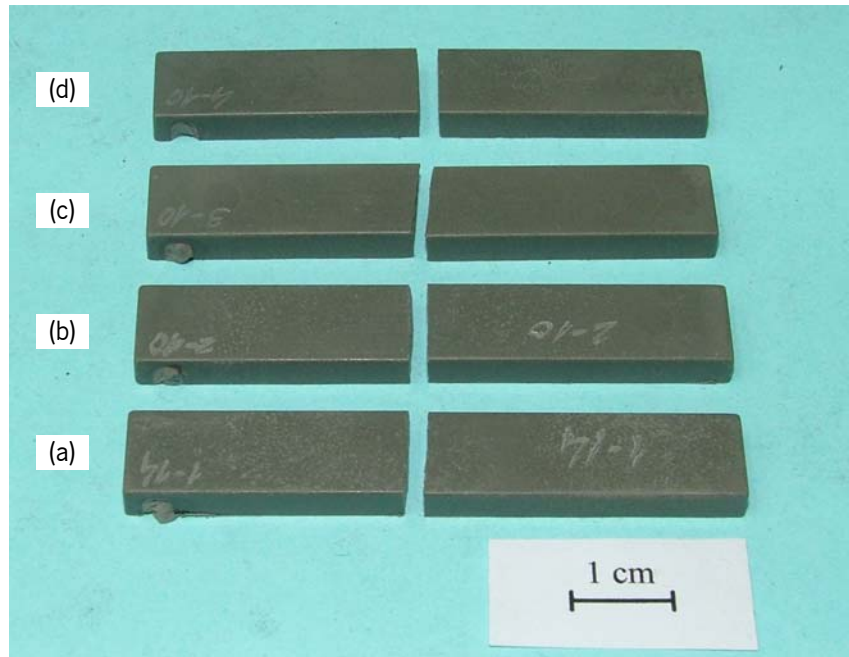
Fractured flexure specimens after testing from different feedstocks: (a) FS-03-66; (b) FS-09-66, (c) FS-13-66 and (d) FS-16-66-
